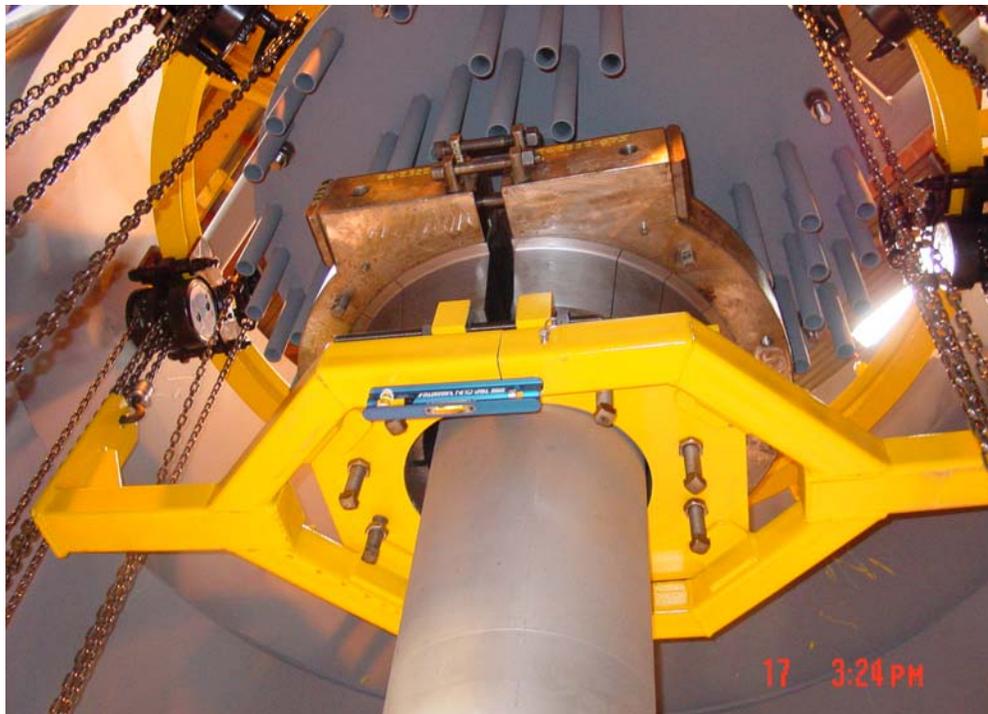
Photograph Illustrating the Mockup Test Setup and MSIP Tool in Place
